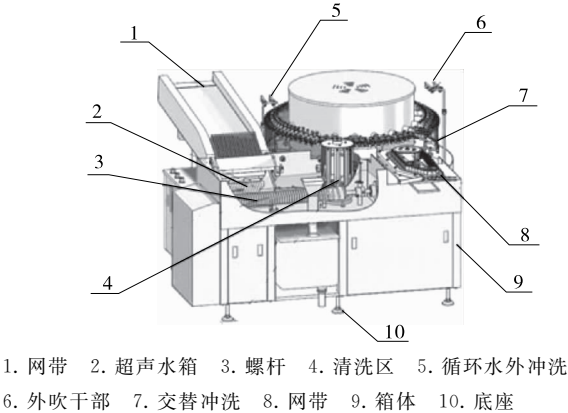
Stereo ultrasonic wave Bottle Washing Machine
